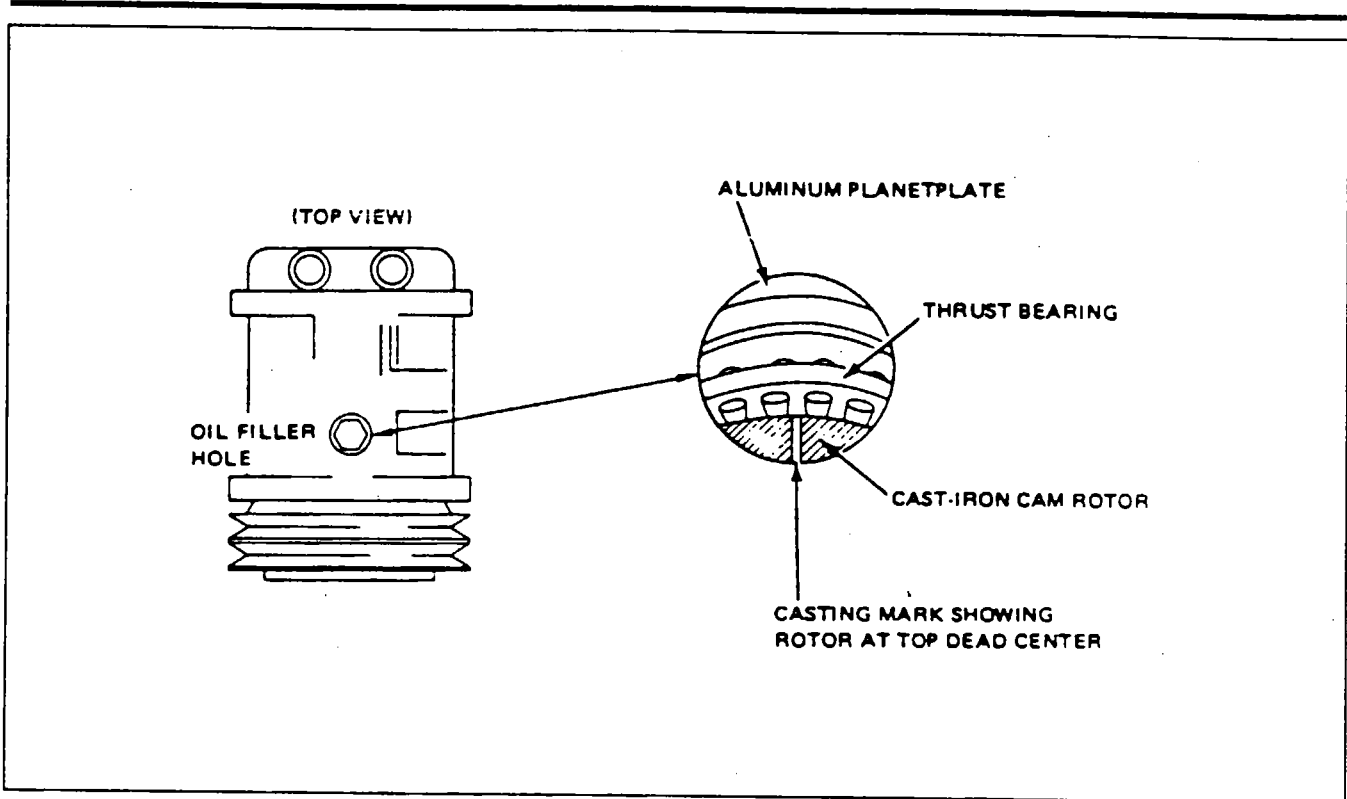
Top Dead Center Casting Mark (Sankyo Compressor)
